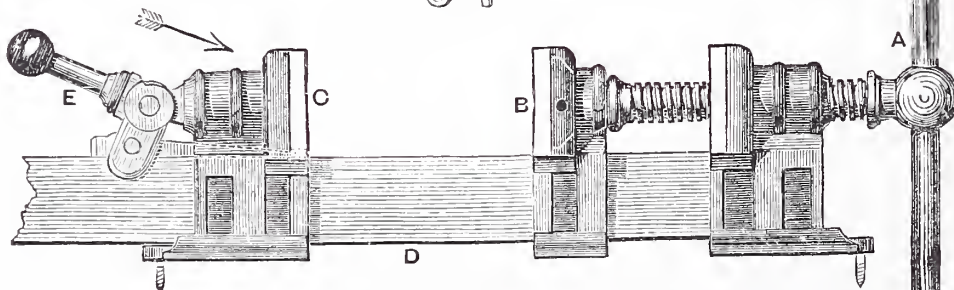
C. H. M. Lever Handle, Bright Bar, Planed Wedge-Action Bench Cramp.
